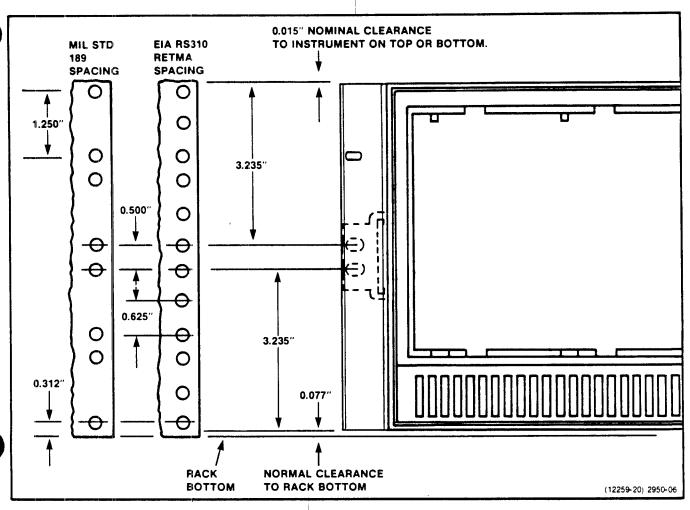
Dimensions and positioning of TM 506A, Option 10, in standard rack.
